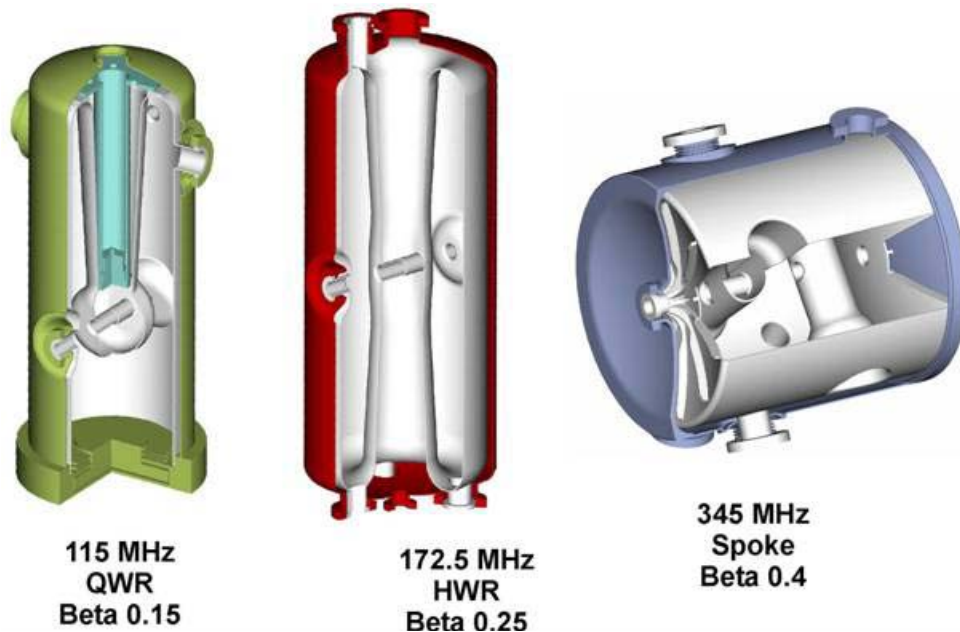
Cut-away section views of the niobium shell and stainless-steel housing of three drift-tube loaded cavities for the RIA driver linac
